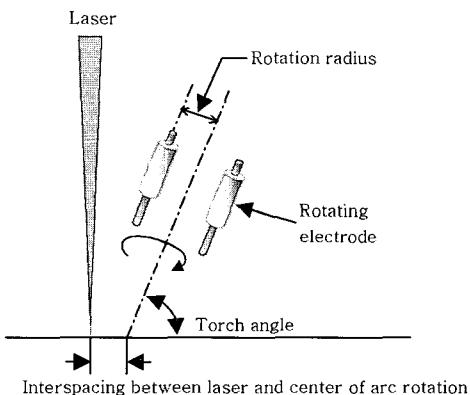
Schematic diagram of laser-rotating arc hybrid welding process
